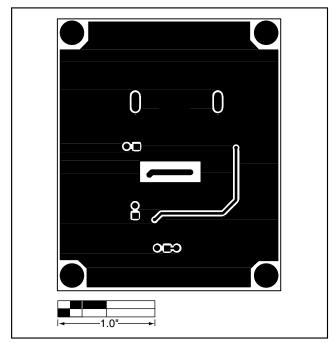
MAX1644 EV Kit PC Board Layout—Solder Side
